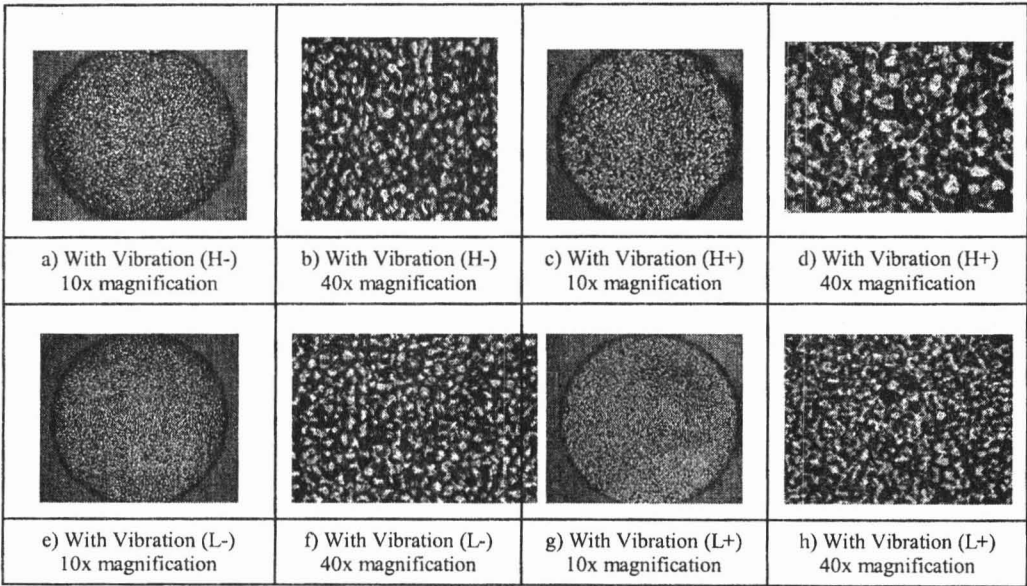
Surface Morphology of Tungsten Carbide Machined with Vibration under Stereomicroscope in 10x and 40x Magnification
